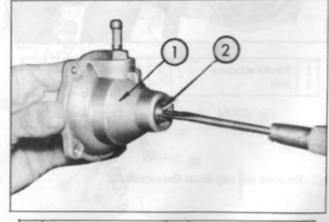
Disassembly drawing of the MZ pneumatic governor
